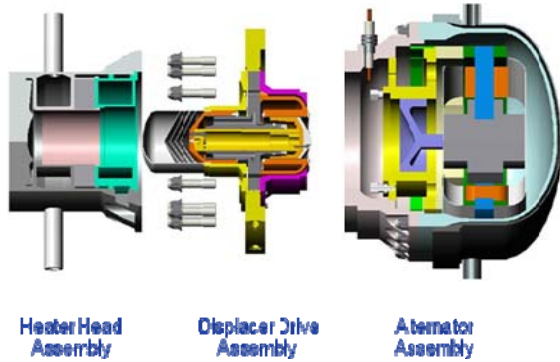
Exploded view of 5 kW free-piston Stirling demonstrator convertor assemblies
